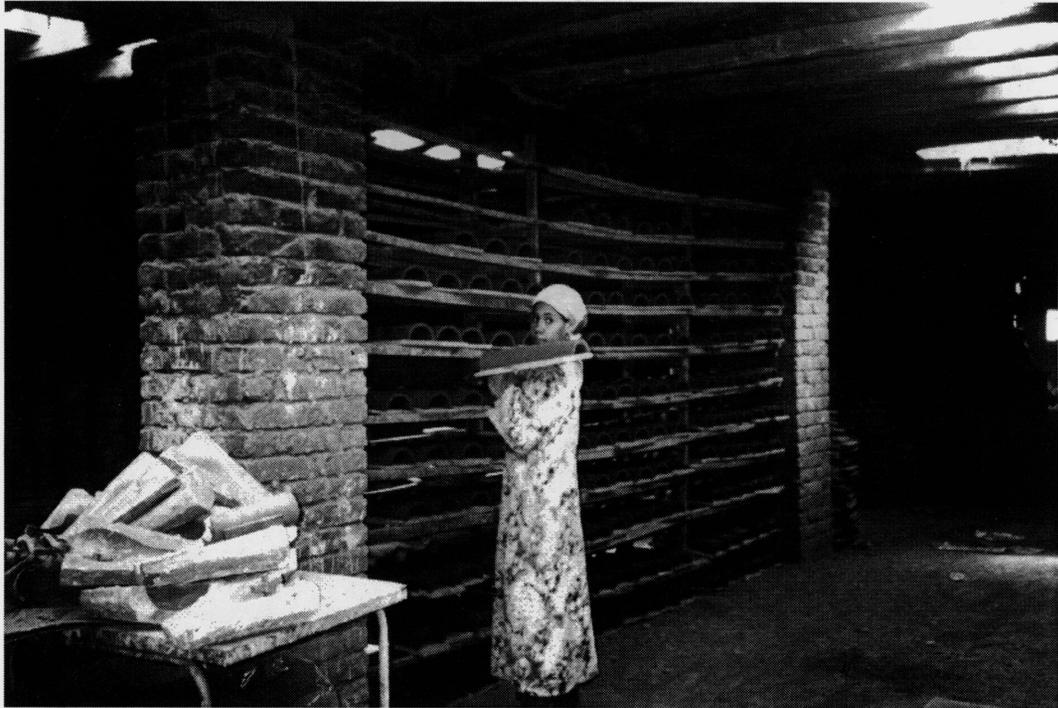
Young assistant placing unfired roof tile to dry in the slatted wooden drying racks in the center of the Old Cairo pottery workshop.
